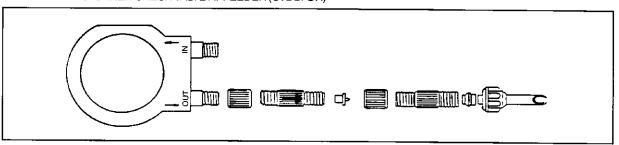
B - STENNER IN-LINE CHECK VALVE (CVDBINL)
